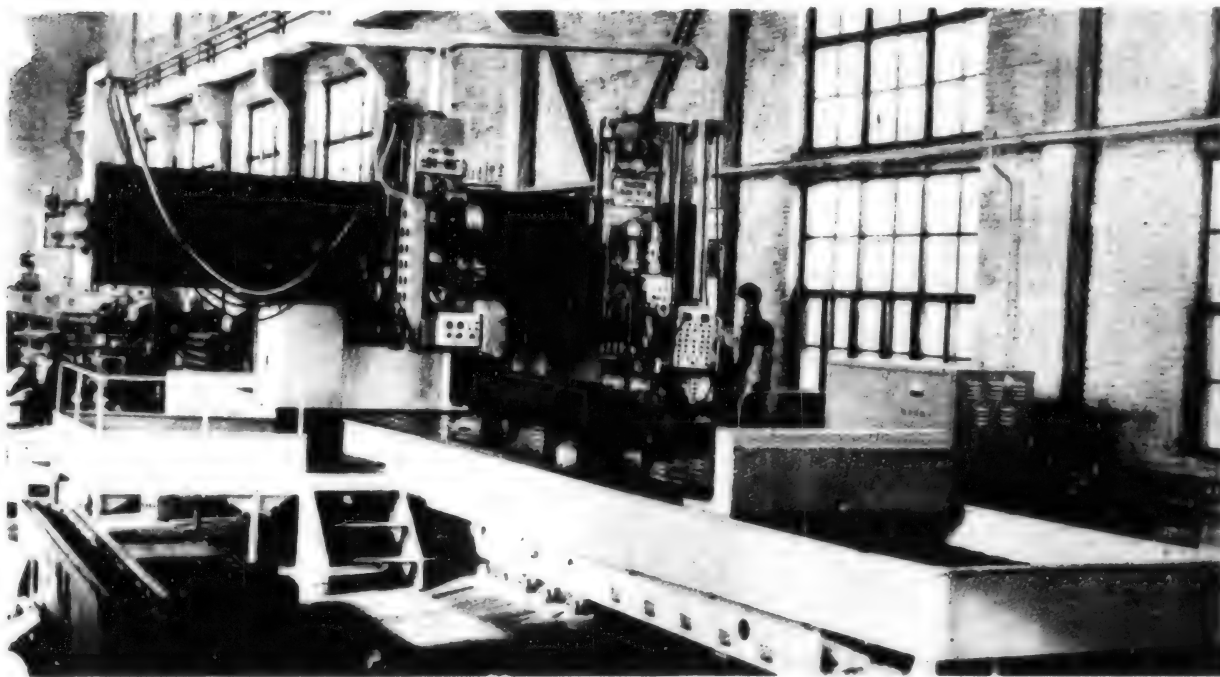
MG 52160 high-precision double-housing grinder designed and built by the Changchun Machine Tool Plant No 1.
